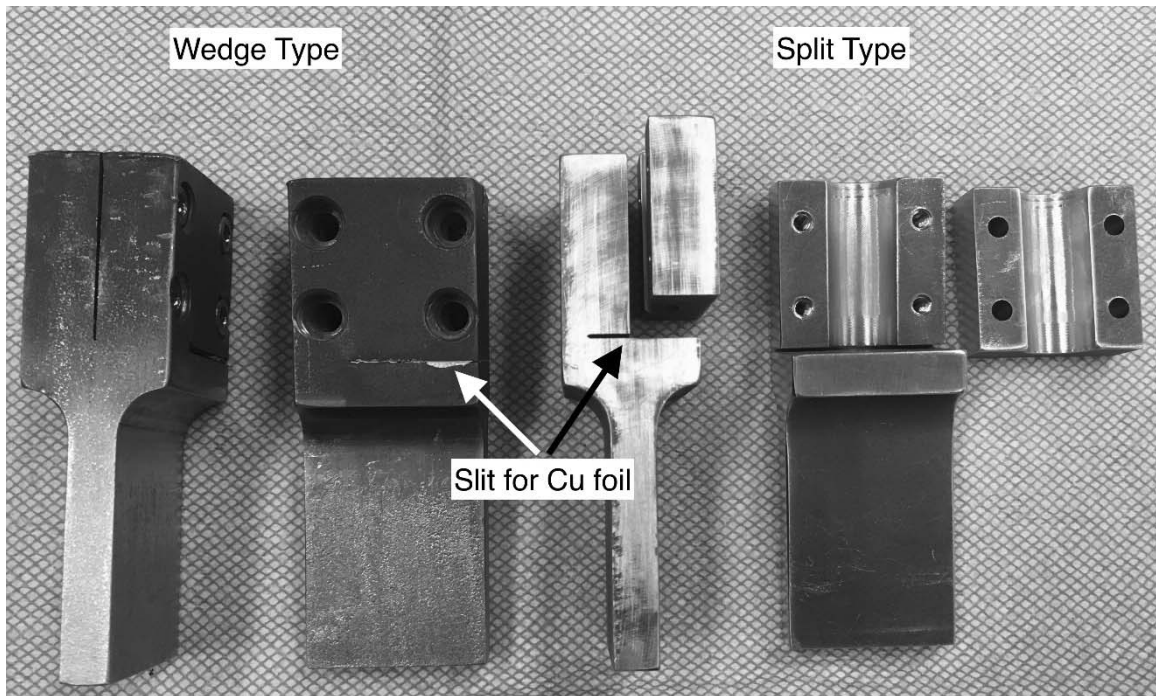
Custom Stainless Steel Holders, Old Design (left) and New Design (right).
